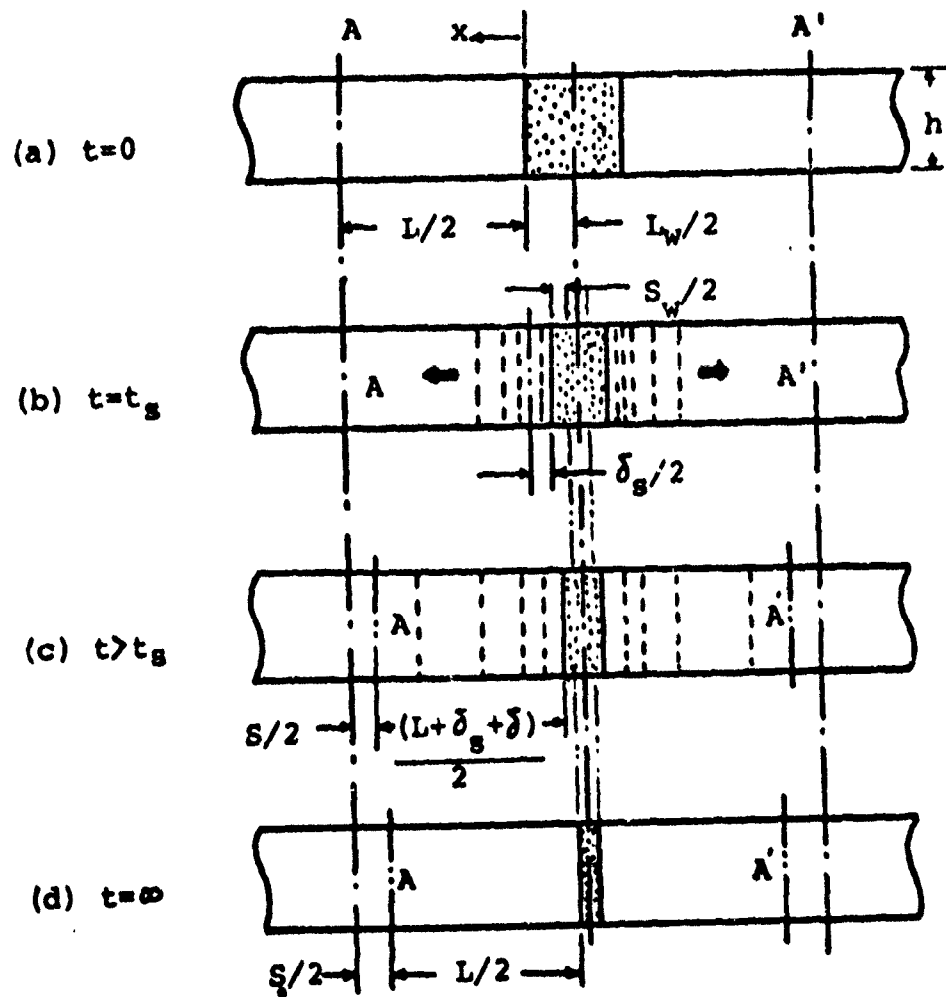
Schematic Presentation of Transverse Shrinkage of a Butt Weld in a Single Pass
